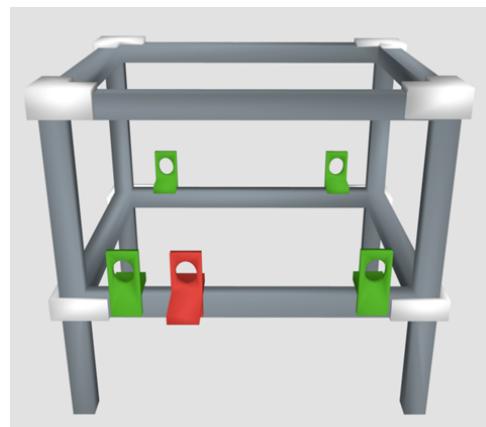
Preliminary CAD of support frame from aluminium extrusion beams
